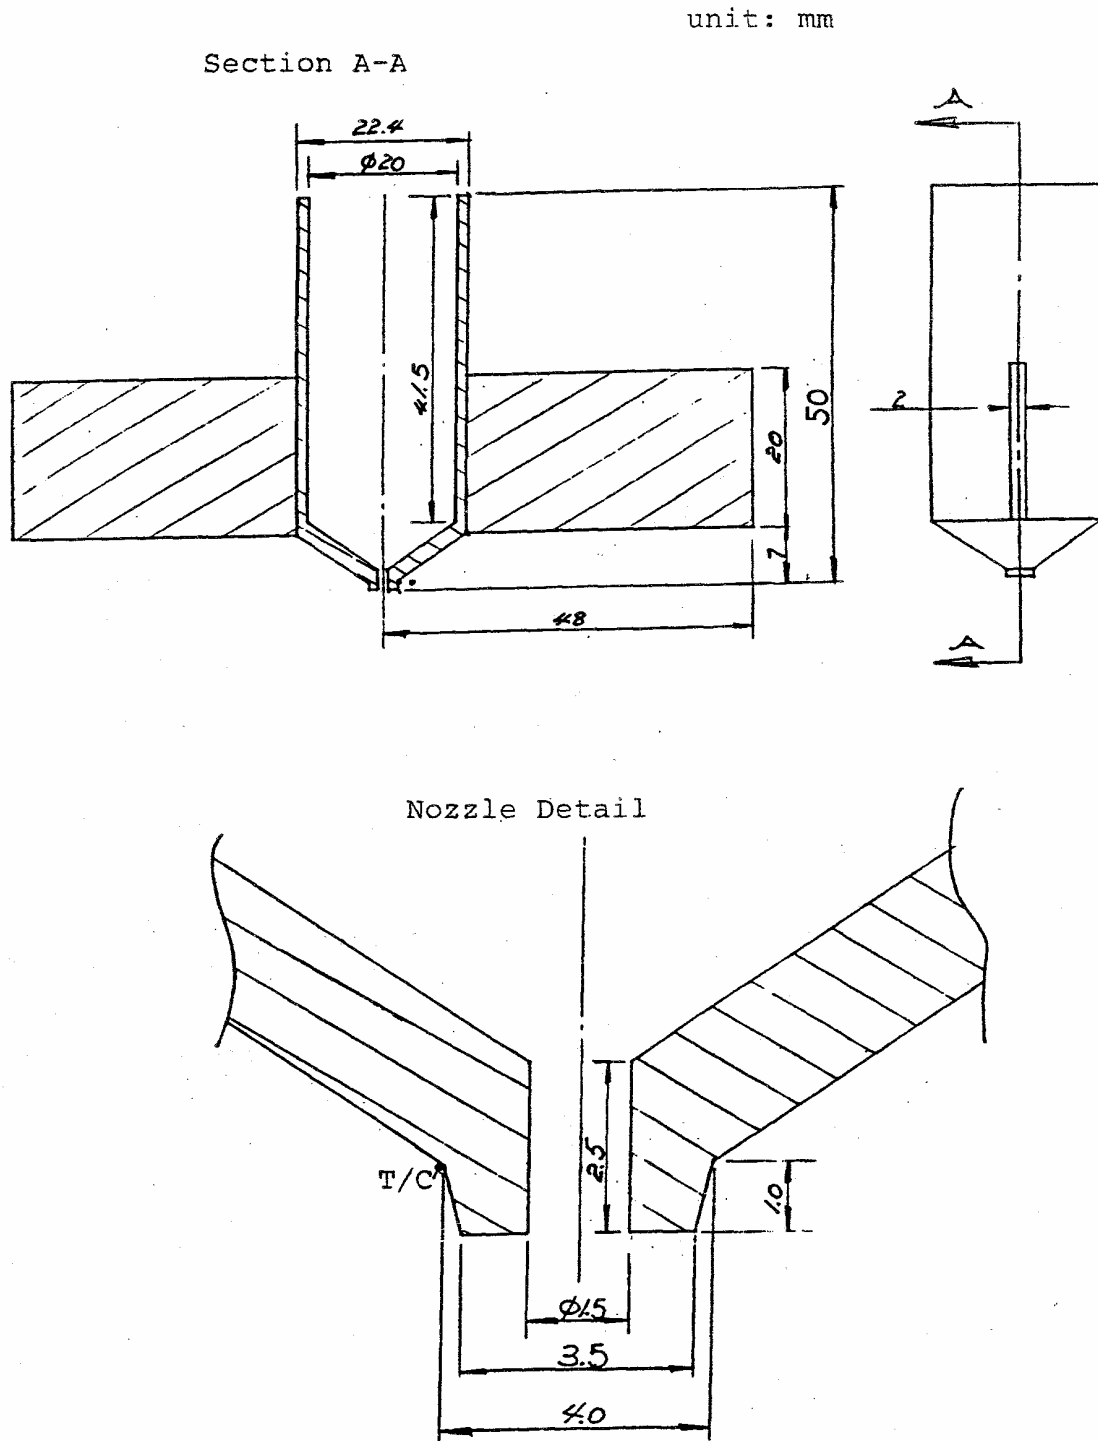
Design of the fiber drawing bushing. After Ho.³
